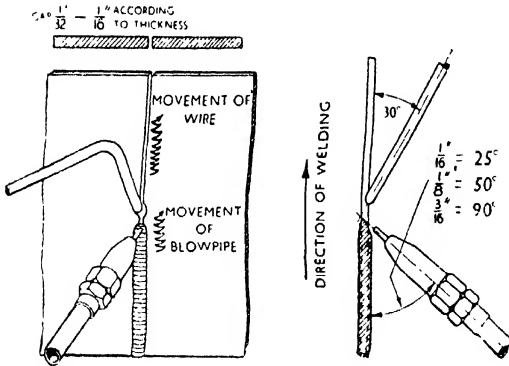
VERTICAL WELDING—SINGLE OPERATOR
